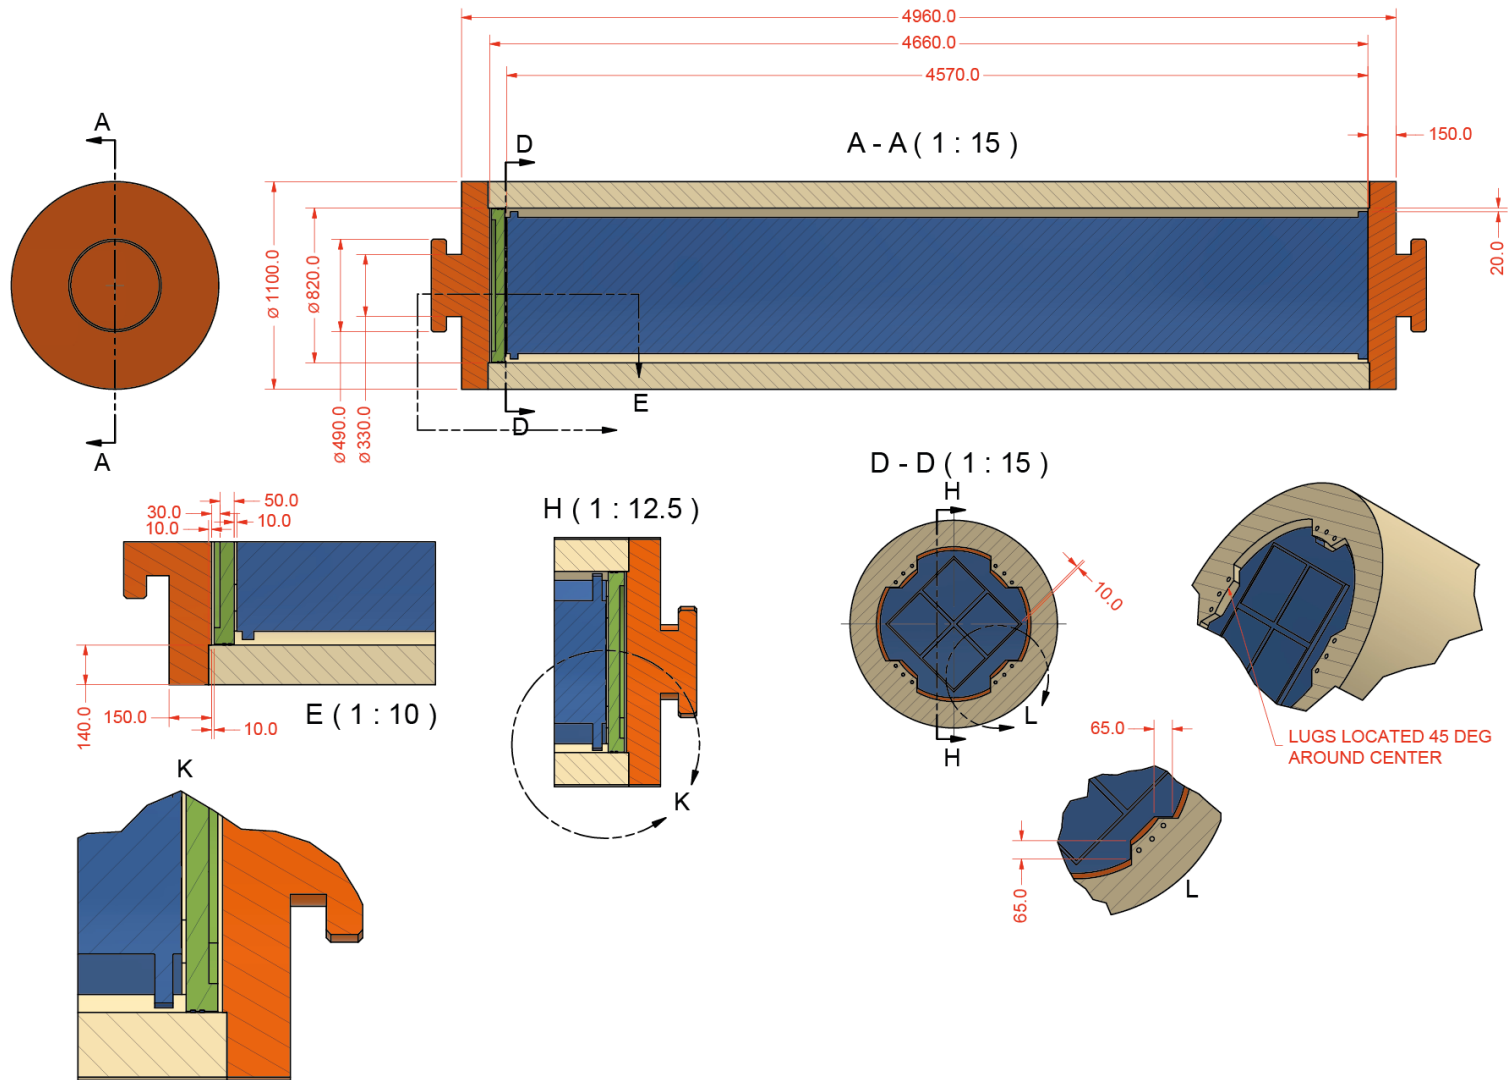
Engineering drawings of a SF-PWR disposal canister
